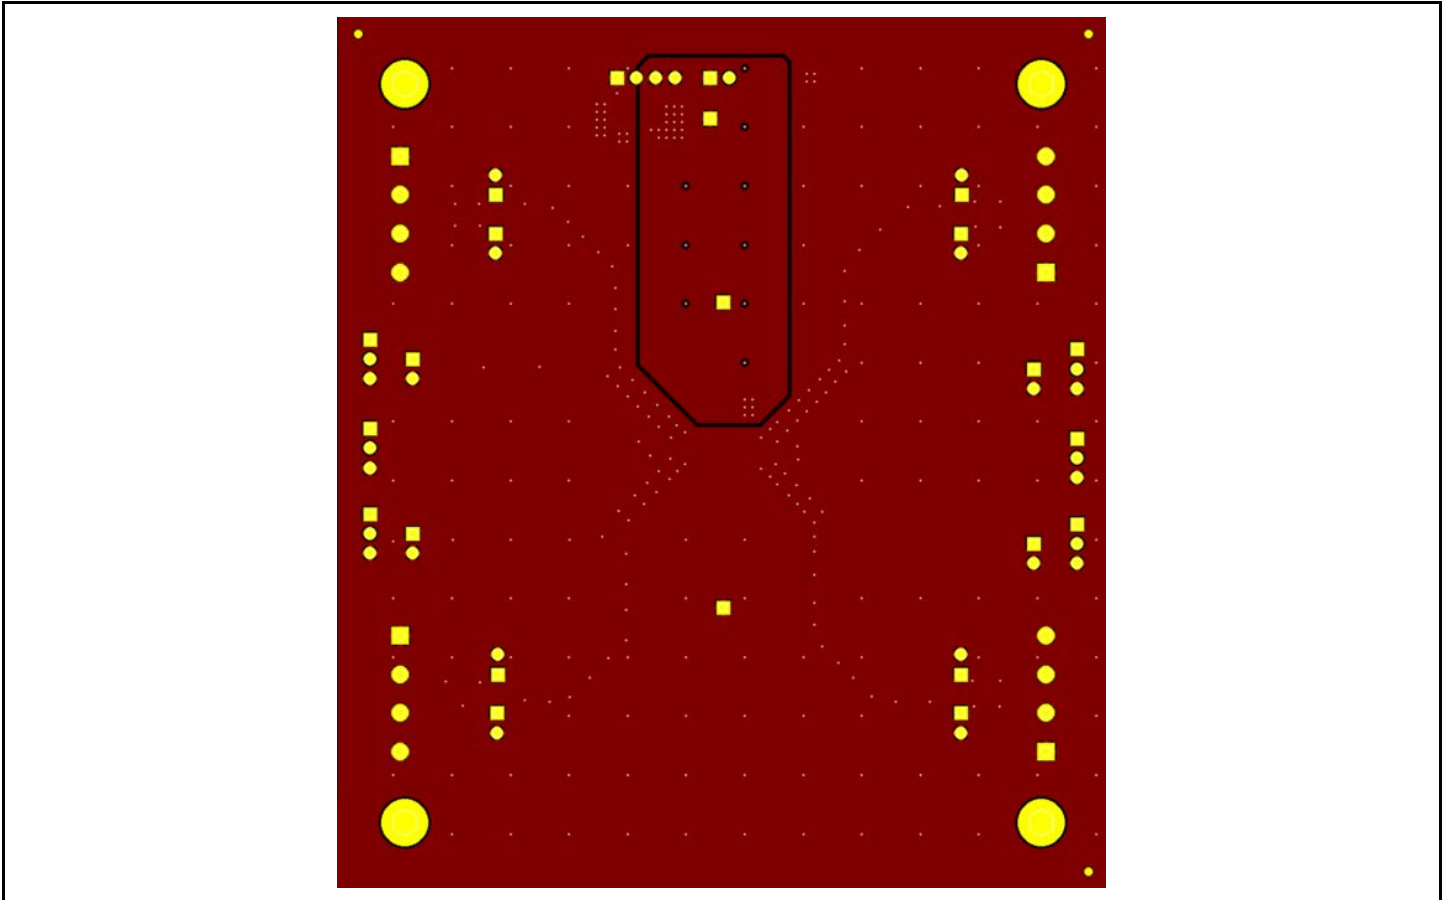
EVK PCB Layer 1—Top View (NSOIC16)
